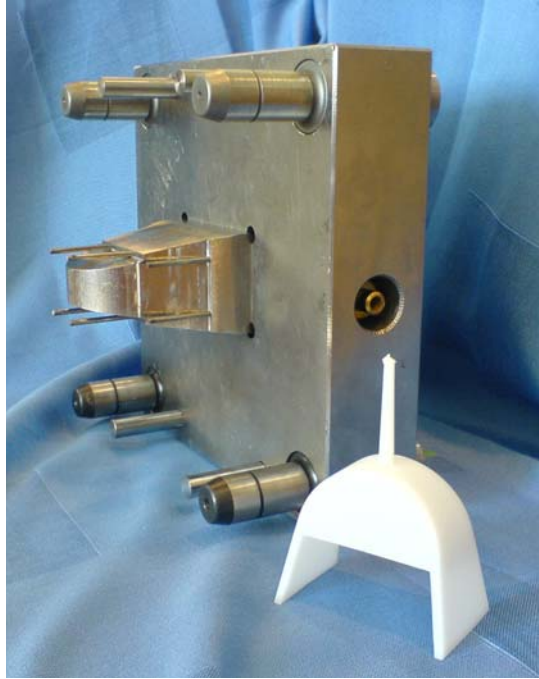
The core plate of a mold where the core insert, the ejector pins, and the inlet of the cooling system are visible. The molded part is also shown. The core was made using FFF.
